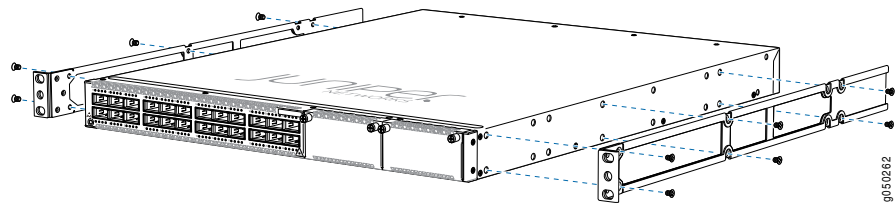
Attaching Mounting Rails to the QFX5100-48S
